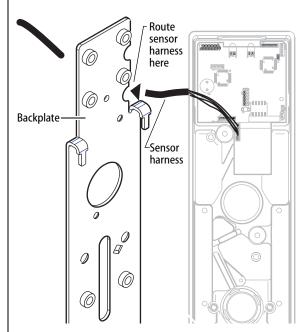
Re-routing the sensor harness for Von Duprin vertical rod and rim without RQE exit devices
